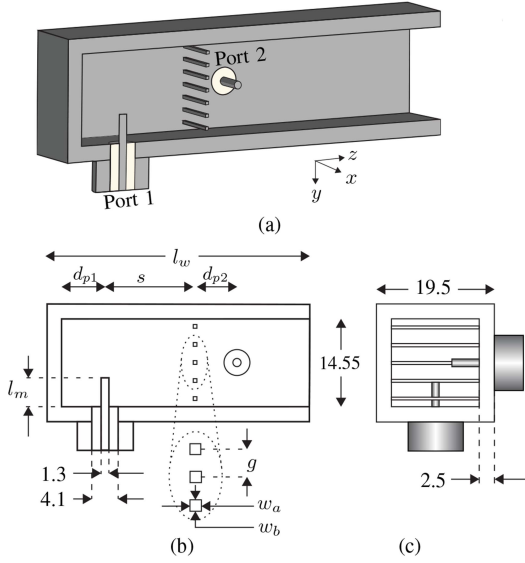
(a) Cut-away view, (b) side view, and (c) front view of the proposed OMT. Dimensions are in mm.
